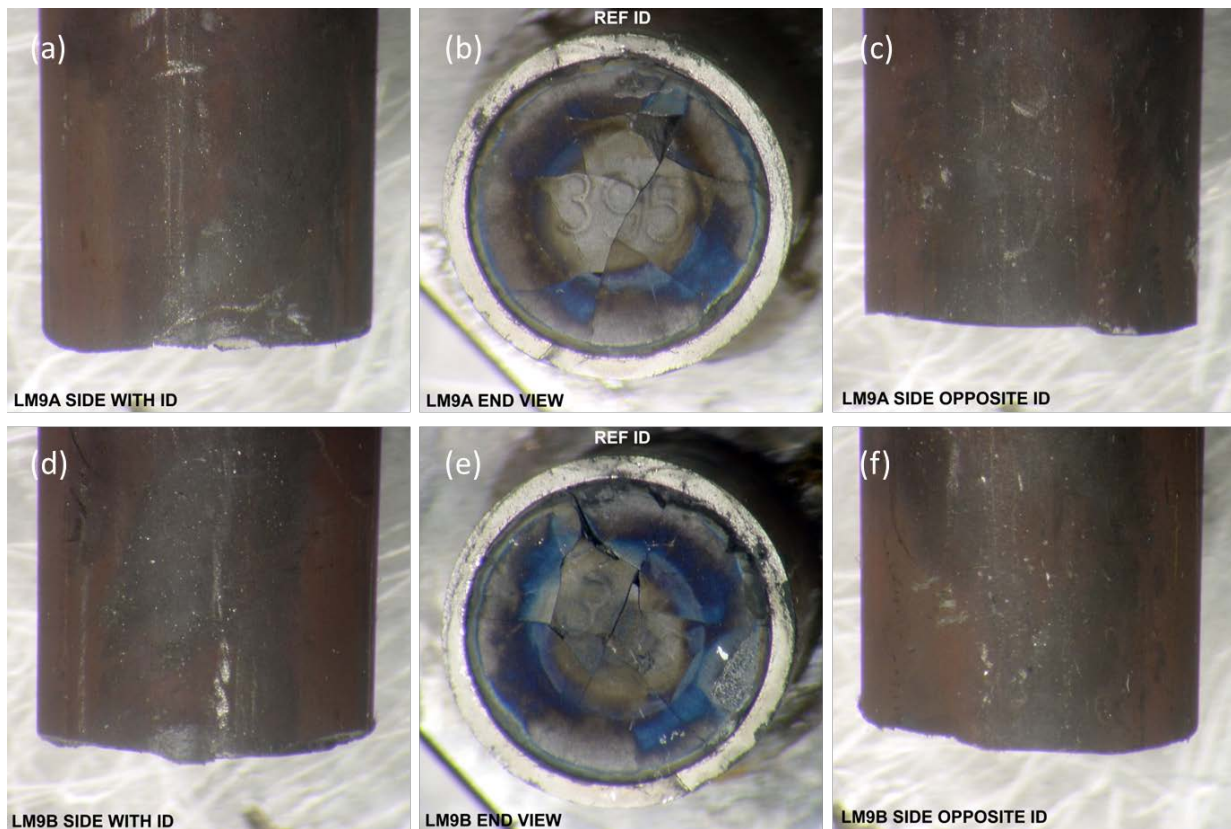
Fracture segments for LMK09/574D-D. (a) and (d) show the specimen ID side of the segment on end caps A and B; (b) and (e) show the mating fracture surface; and (c) and (f) show the opposite specimen ID side of segment on end caps A and B.
